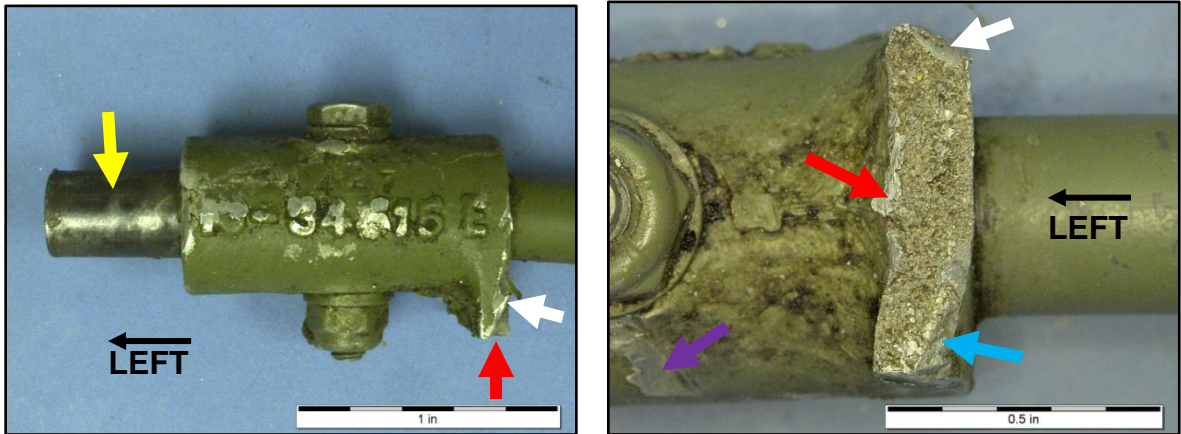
The bellcrank identified in Figure 76 (left) and the fracture indicated by the red arrow (right).
